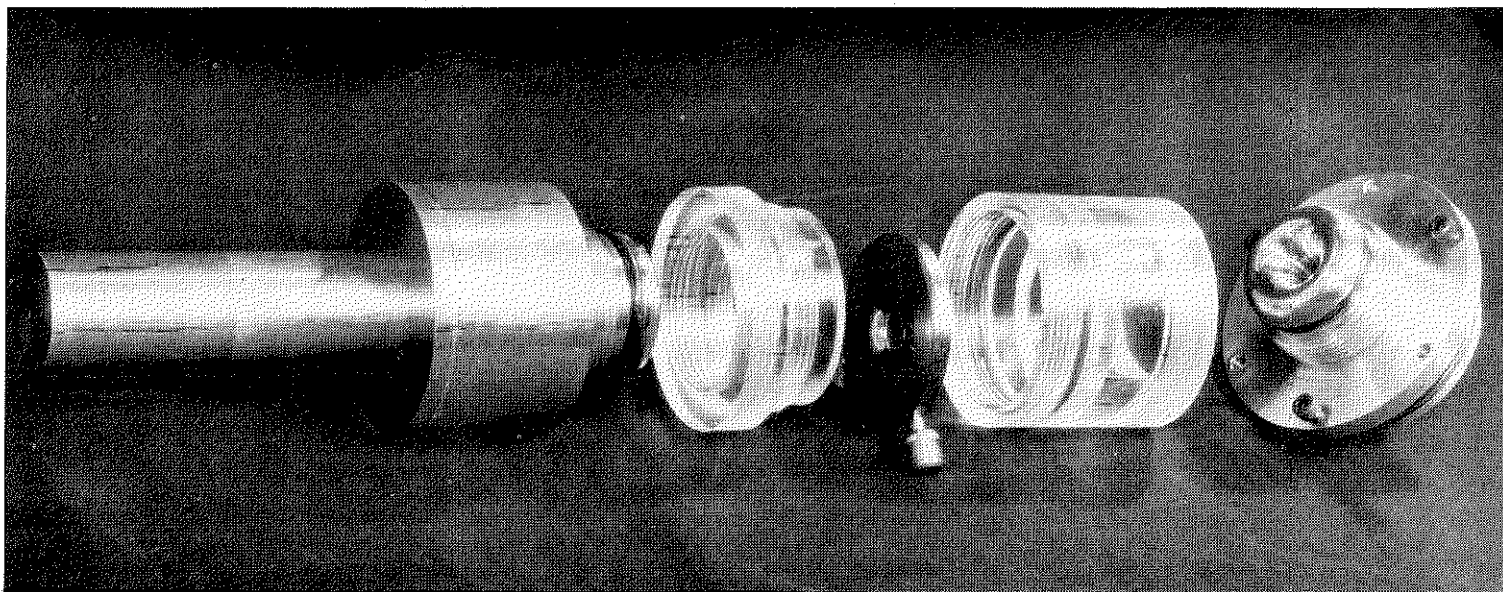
EXPLODED VIEW OF THE ELECTRON LENS, SHOWING THE
